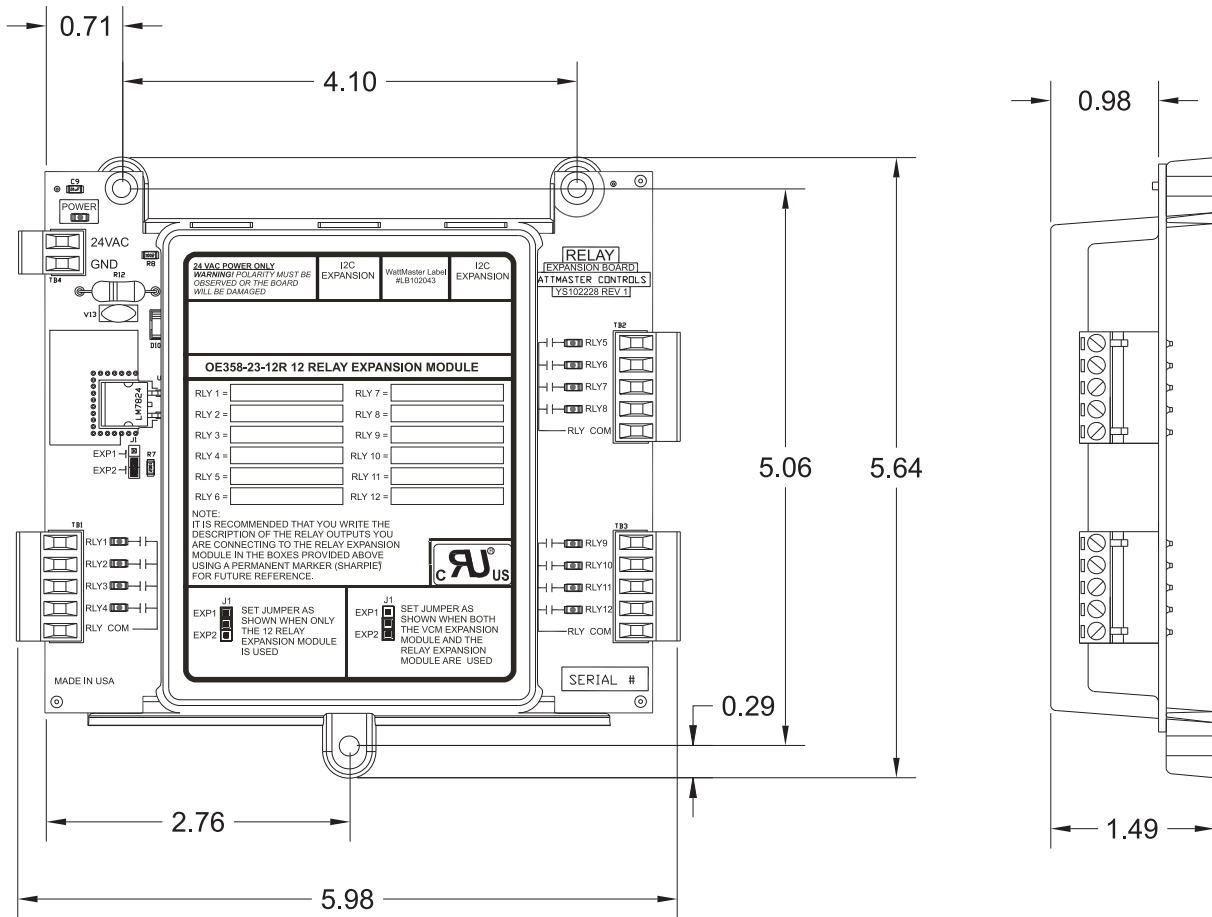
OE358-23-12R – 12-Relay Expansion Module Dimensions
